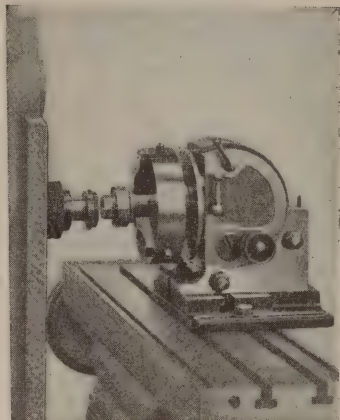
Raising block. Shows the head held on the raising block and set around 90 deg.
